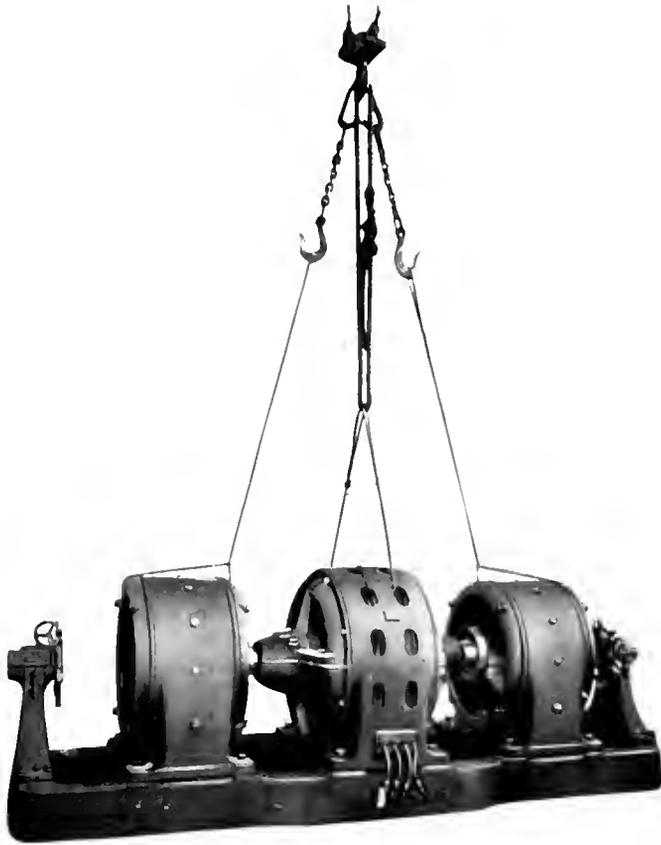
Lifting Motor-Generator Sets Wrong Way
